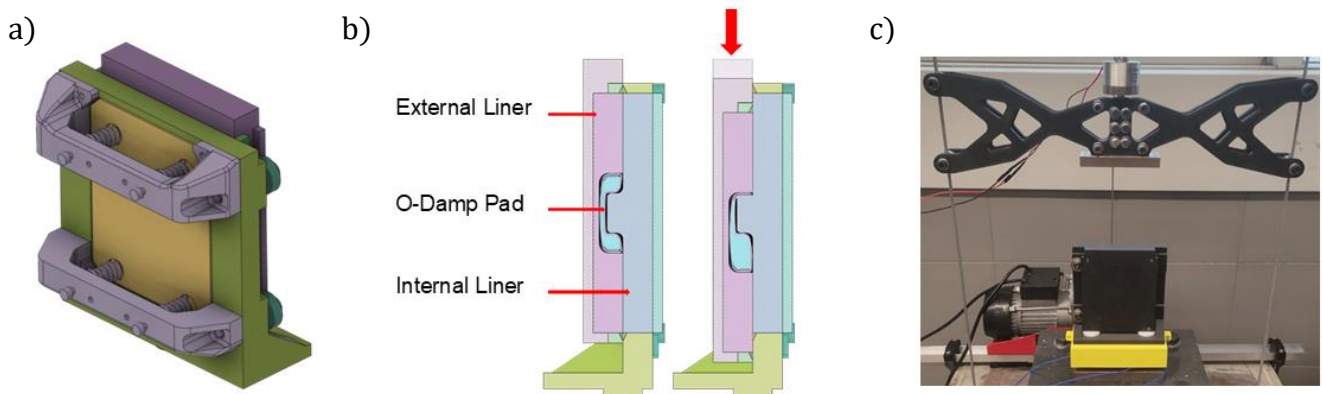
a) Assonometric view of the comparator device. b) Section of the inner of the device in which is possible to view the PAD between the liners. c) Dropweight machine test setup
